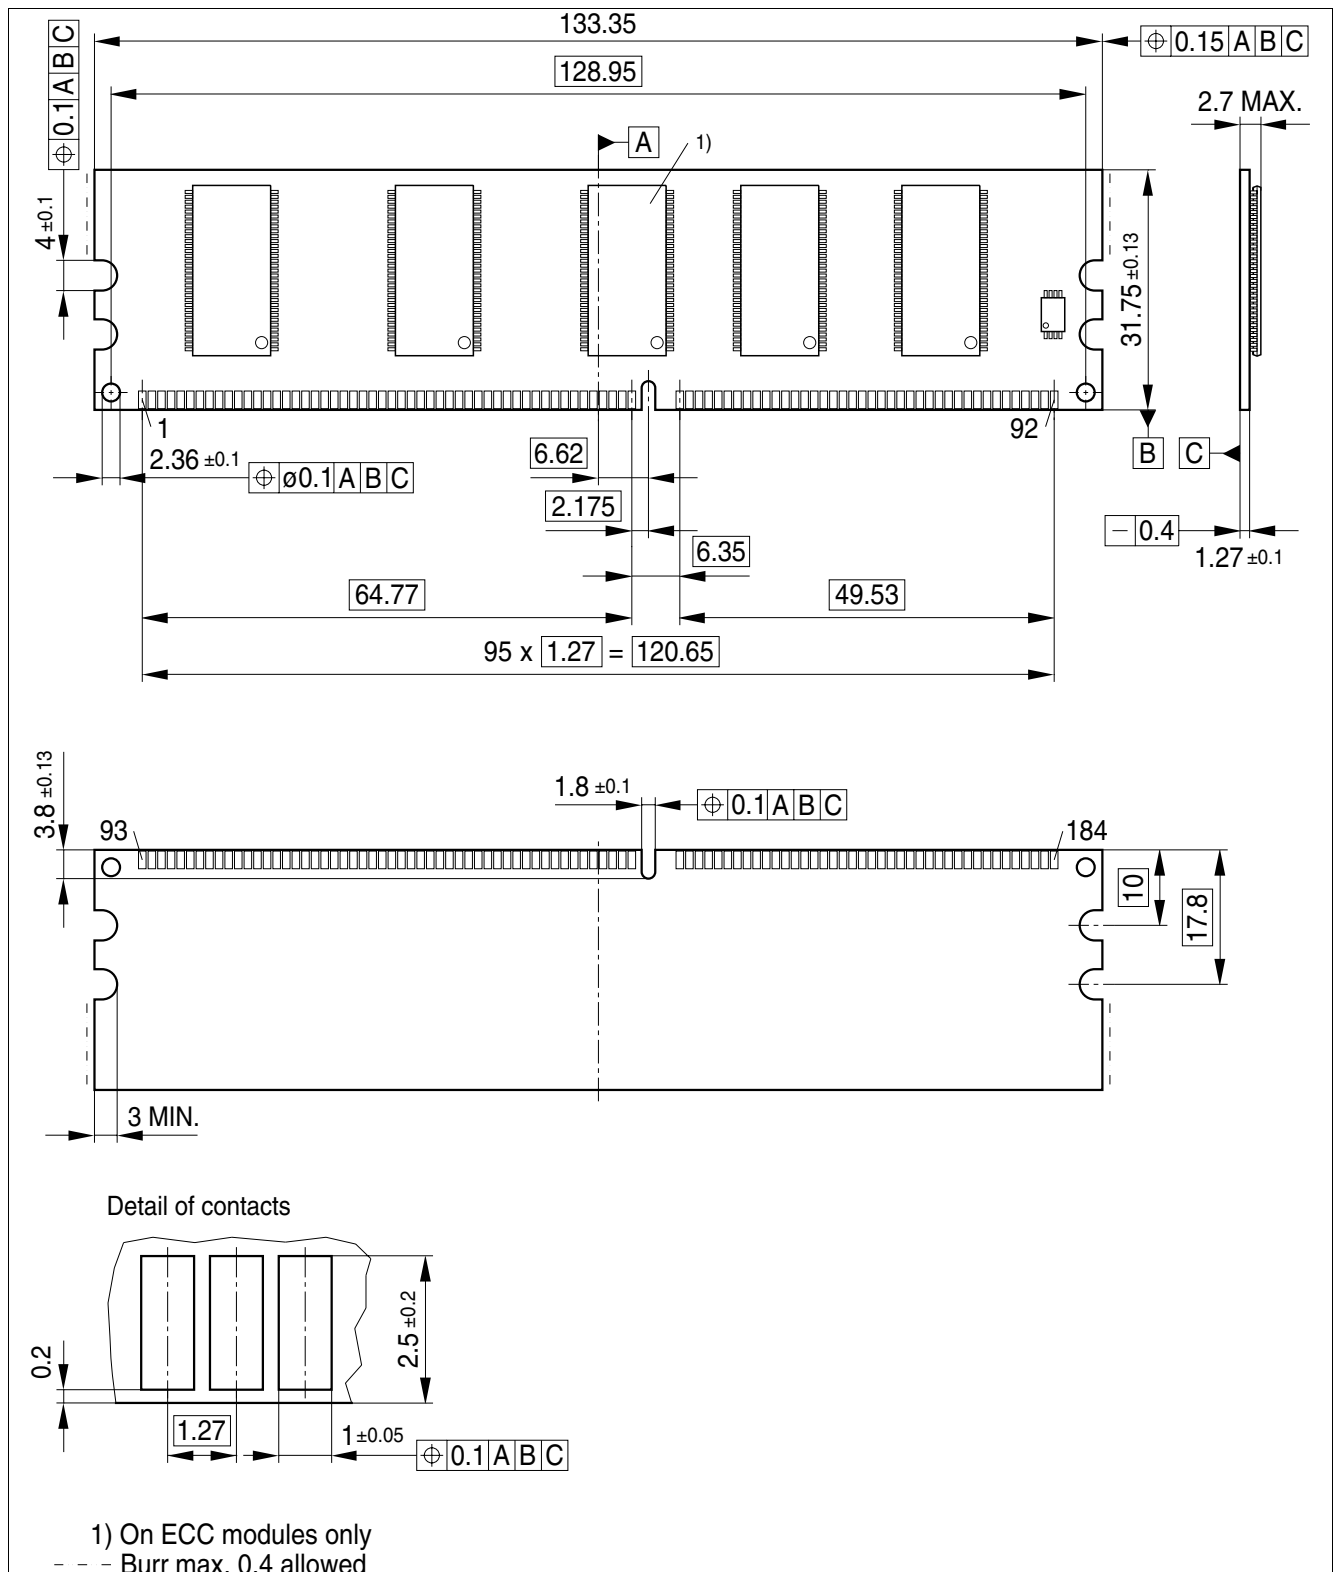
Package Outlines - Raw Card C 128 MByte, 1 Rank Module
